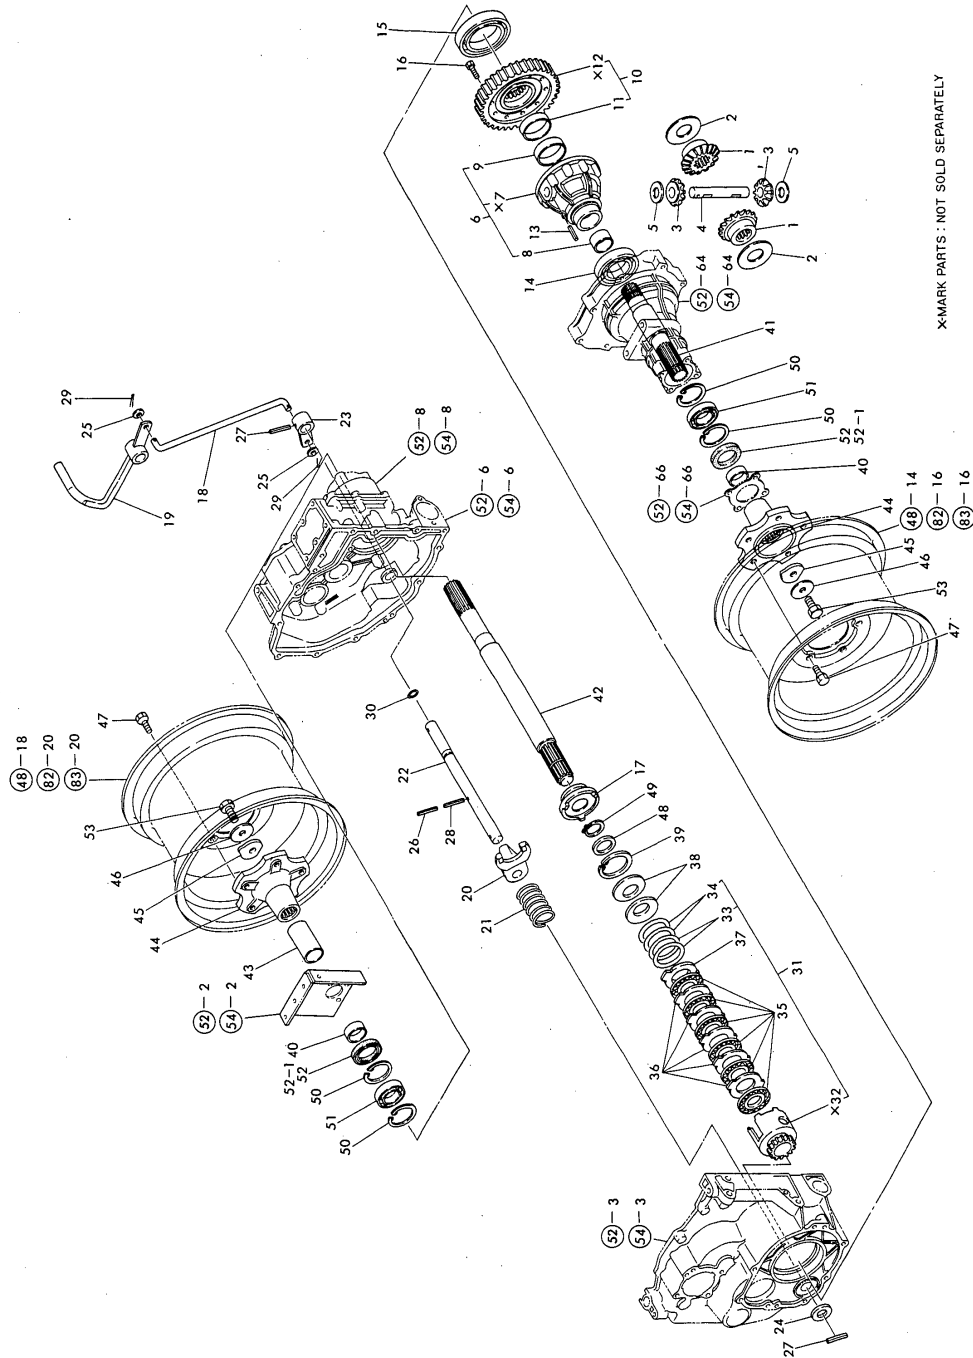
DIFFERENTIAL GEARS & REAR AXLE SHAFT
